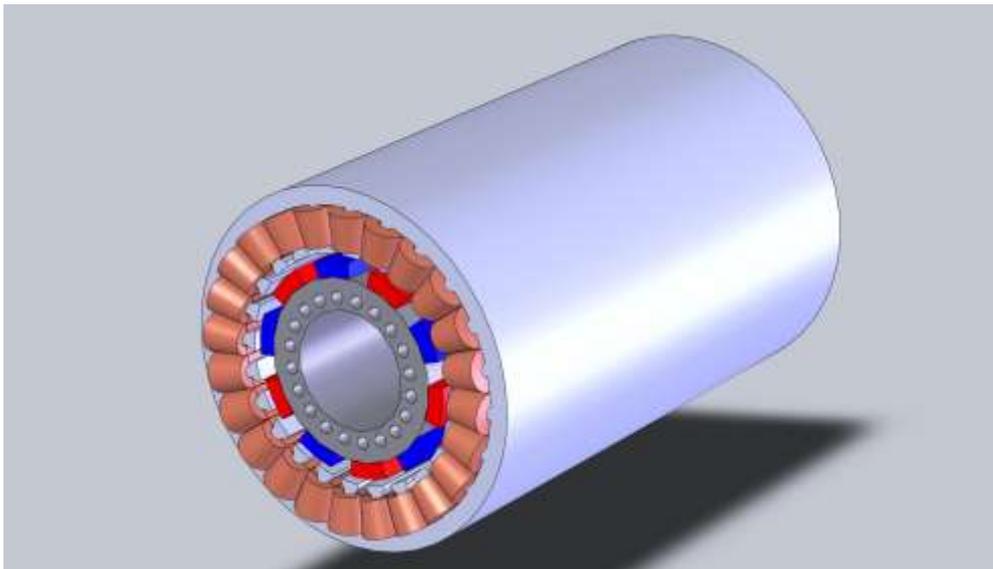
Permanent magnet machine with surface mounted magnets and concentrated winding design.
